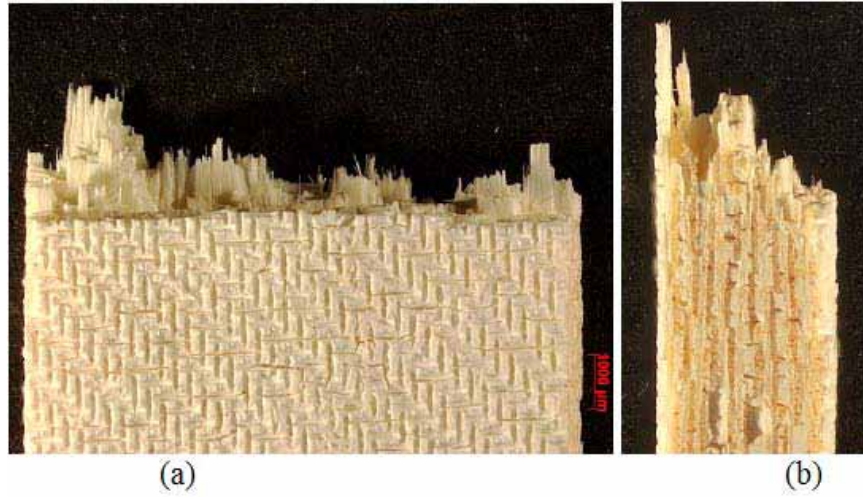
Fracture surface of C4 composite specimen tested in creep at 37.5 MPa at 1100 °C in laboratory air ($t_f > 100$ h): (a) front view and (b) side view
